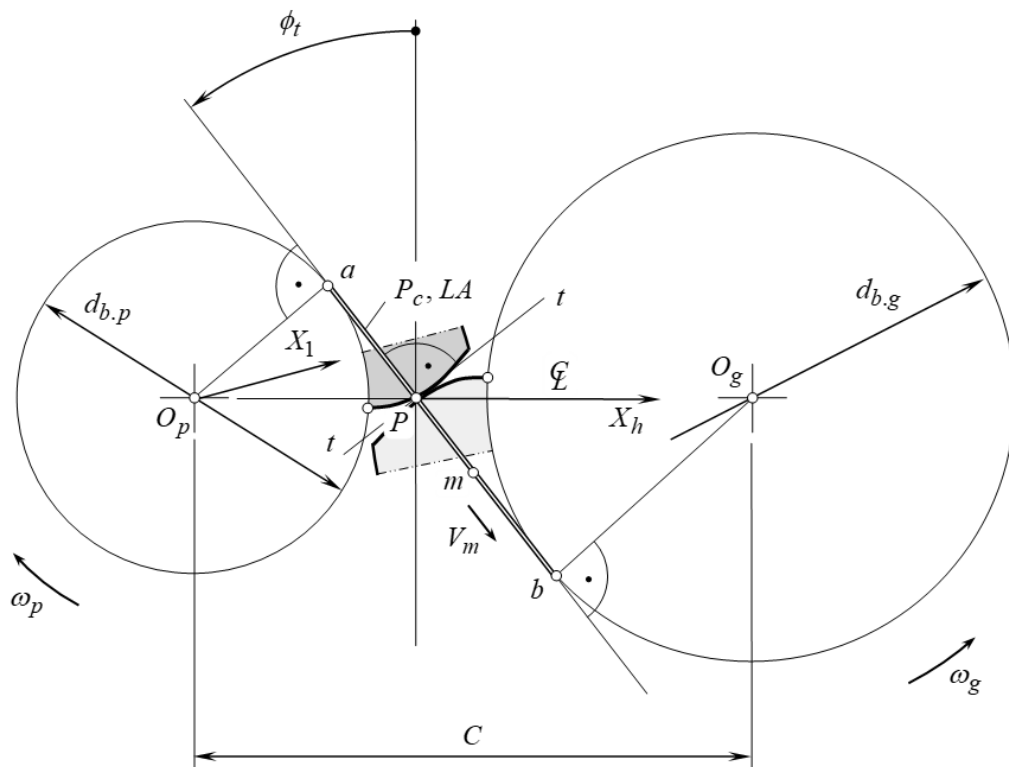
Second fundamental law of gearing (conjugate action law): Generation of natural form of a gear tooth profile in geometrically-accurate parallel-axes gearing.
